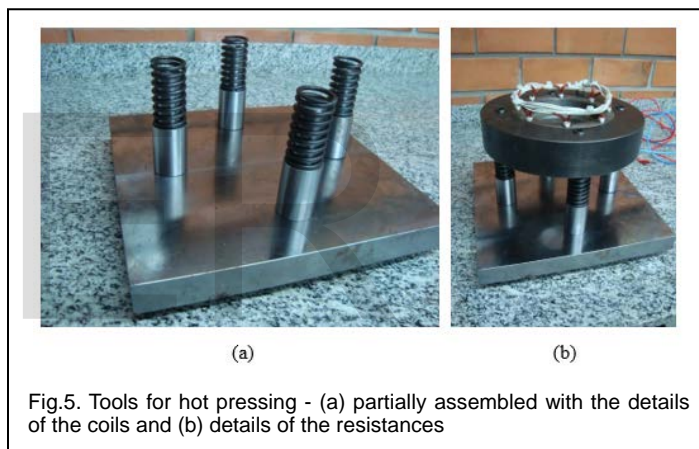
Tools for hot pressing - (a) partially assembled with the details of the coils and (b) details of the resistances
